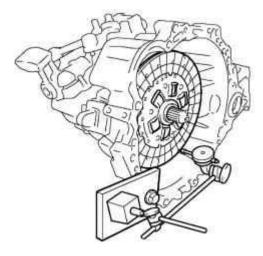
Installing slave drive clutch to the shaft of the gearbox
